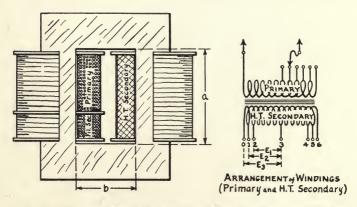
Arrangement of windings and plan of step-up transformer.
